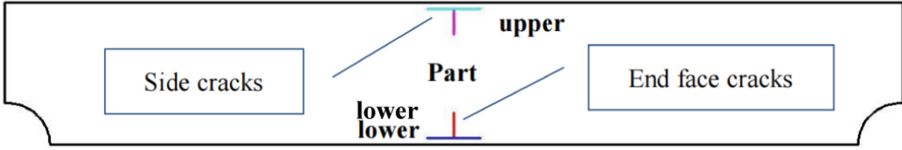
Two types of cracks on the surface of hot stamped parts.
